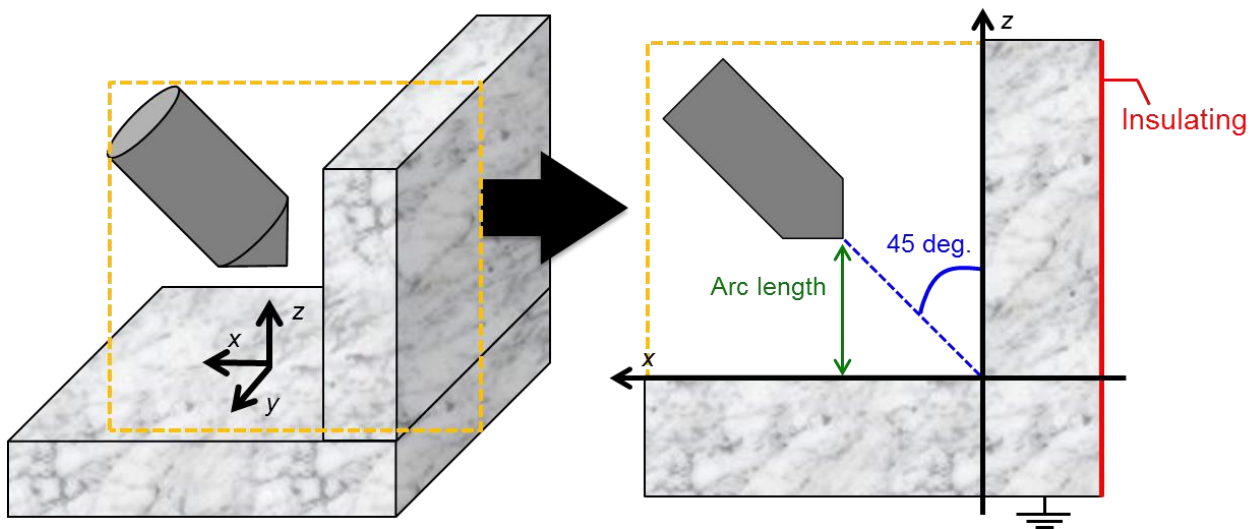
Schematic image of calculation domain for fillet welding
